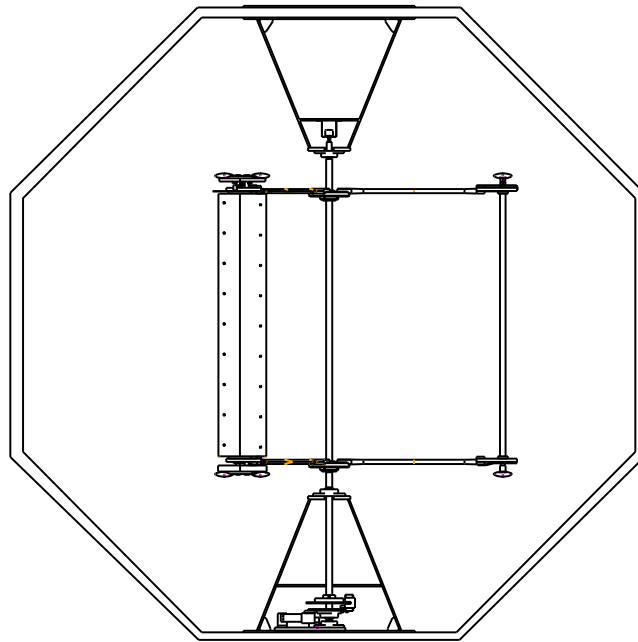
Turbine in the 3 metre high wind tunnel test section
